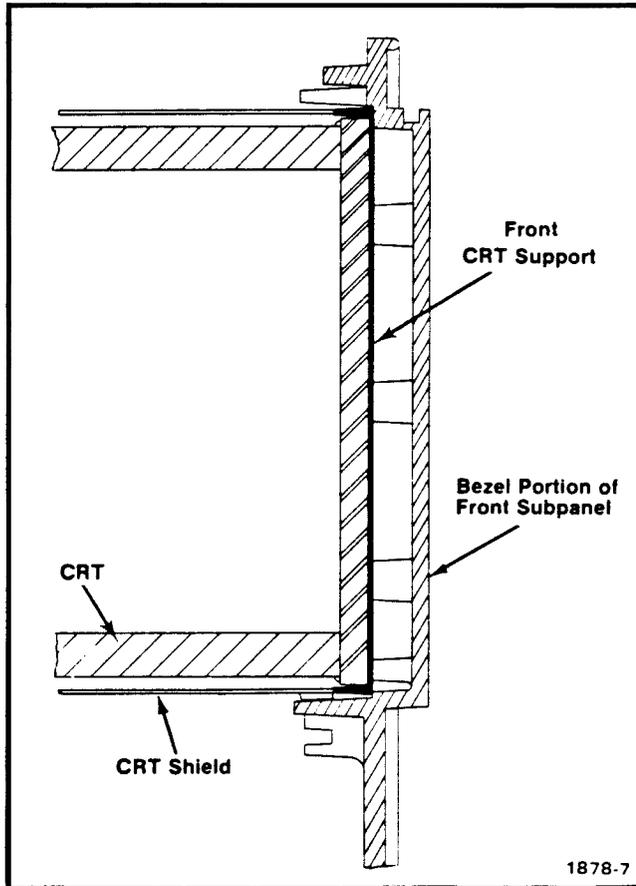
Cross sectional view showing placement position of front crt support, crt shield and crt.
